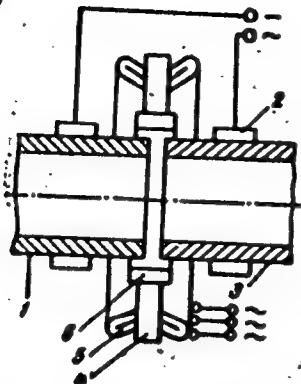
Schematic of the device for welding of pipes by a rotating arc, displaced by a traveling magnetic field. 1 and 3 - pipe; 2 - welding-jolt-rassing mechanism; 4 - core; 5 - inductor windings; 6 - ring of heat-resistant material for protection of inductor.
